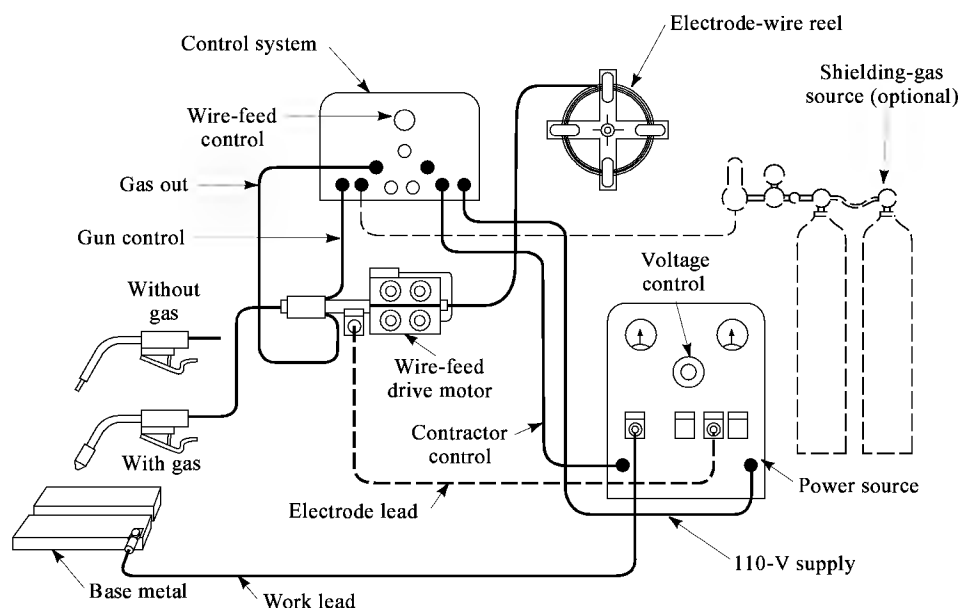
The flux-cored arc-welding (FCAW) system (2).
